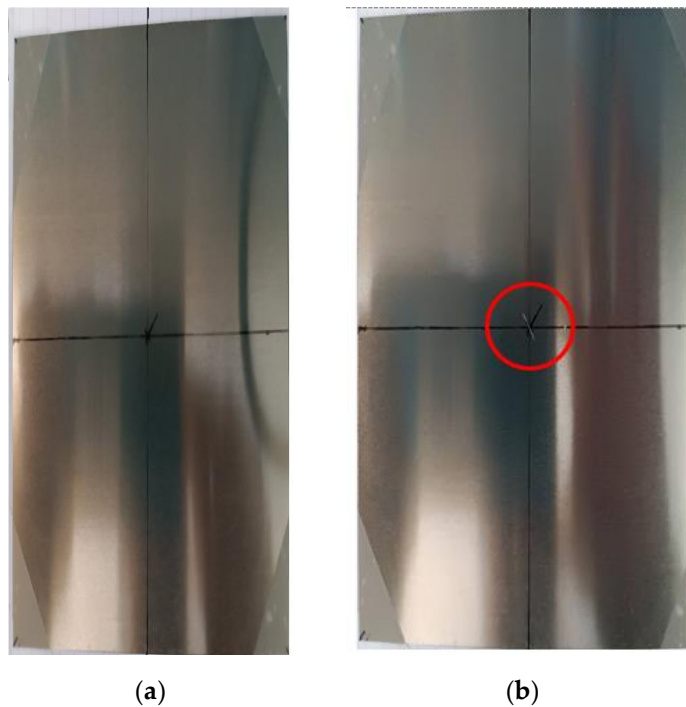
Image of specimen: (a) Being flawless; (b) With a flaw at its center [183].
